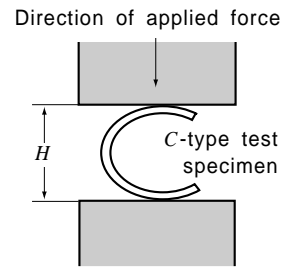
Flattening Test for C-type Test Specimen
